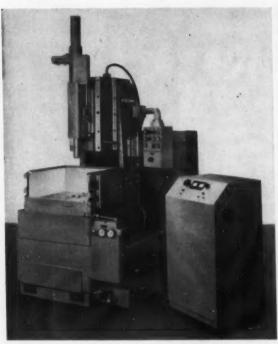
Large "Elektrojet" die-sinking machine equipped with heavy-duty ram type work-head and disappearing tank
